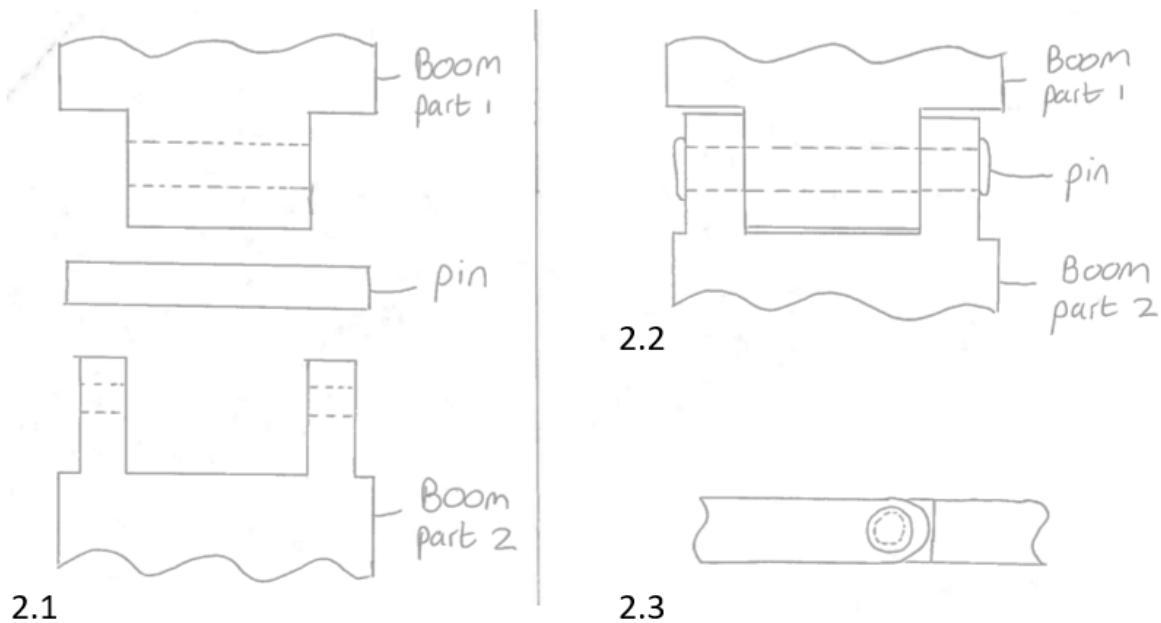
Top view disassembled hinge (2.1), top view assembled hinge (2.2), side view hinge (2.3)
